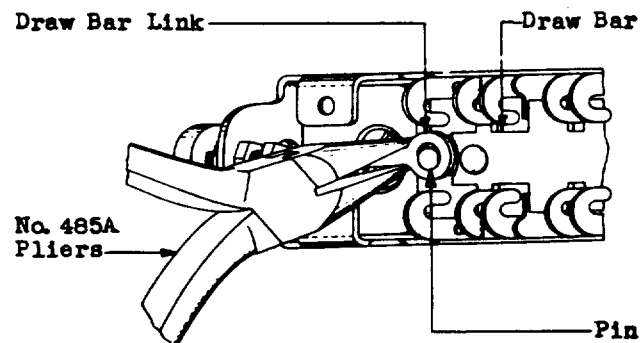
Method of Disconnecting Draw Bar Link from Spring Load
